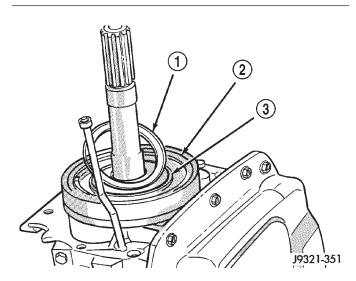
Overdrive Piston Thrust Bearing Removal/ Installation
